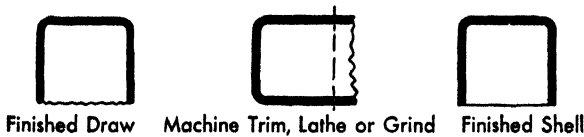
Machine or box trim. Tooling cost low but method slow. The best appearing edge is produced.
